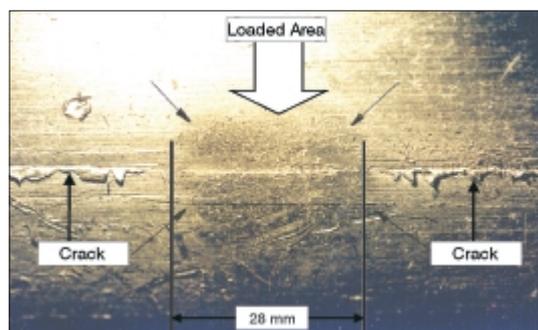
Externally loaded area and associated crack path on the outside wall of a polyethylene pipe
